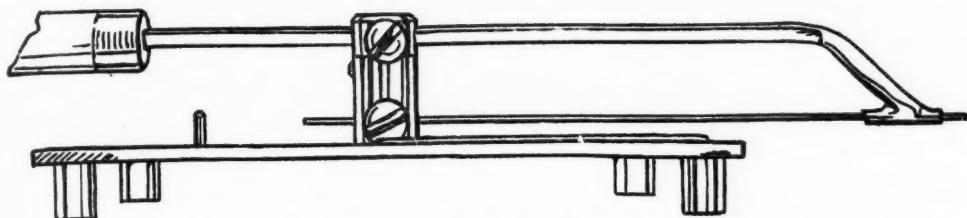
Side view showing wire through tube and fastened with screw on the end.
